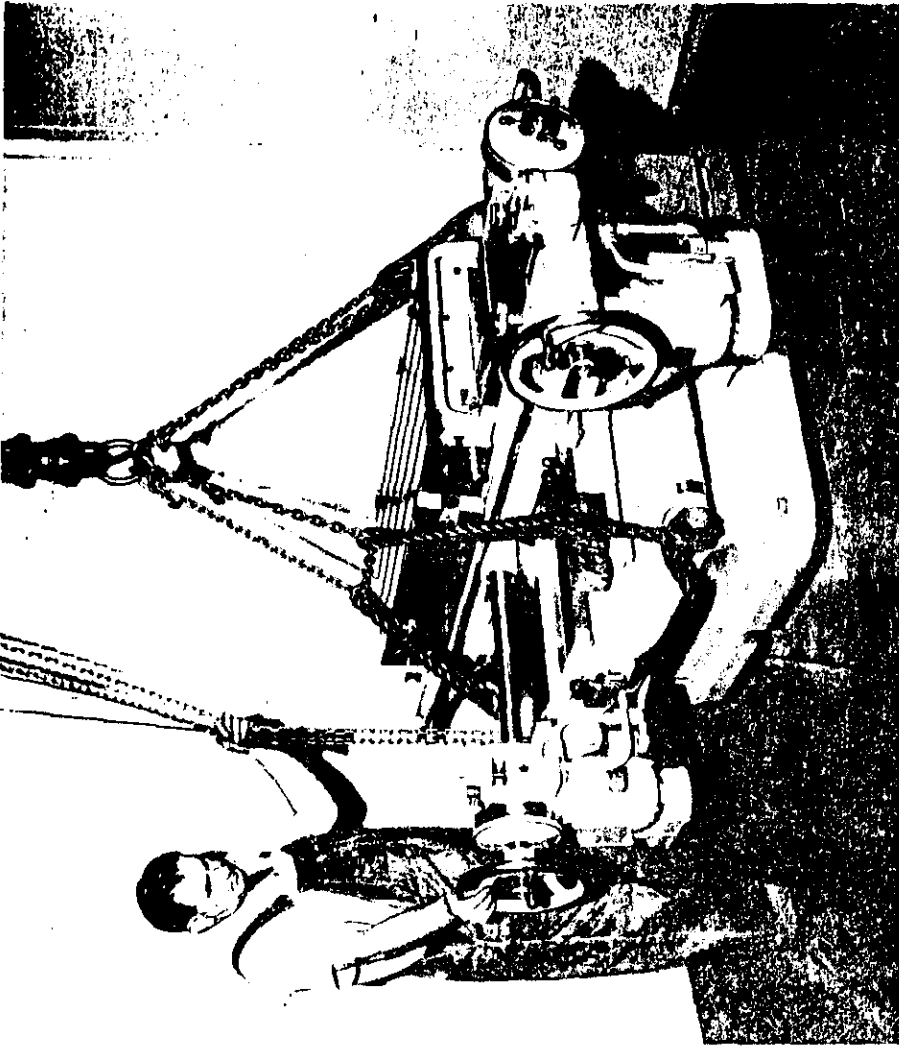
With a 1½" bar through the holes in the front of the base, place rope slings around the bar and through the openings cored in the rear of the base casting and lift into place. Use wooden blocks to protect the finished surfaces and padding to protect the paint as shown.
